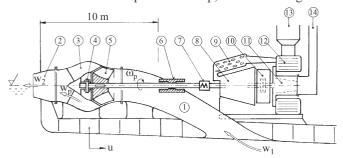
The waterjet propulsion system located in the ship's stern part: 1 - diffuser; 2 - confusor (outflow nozzle); 3 - guide vanes; 4 - thrust & journal bearing; 5 - diagonal-helical pump; 6 - labyrinth gland/journal bearing; 7 - highly flexible coupling; 8 - gas turbine; 9 - combustion chamber; 10 - gear box; 11 - axial-radial compressor; 12 - recovery heat exchanger (air preheater); 13 - exhaust gas duct; 14 - air inflow duct
